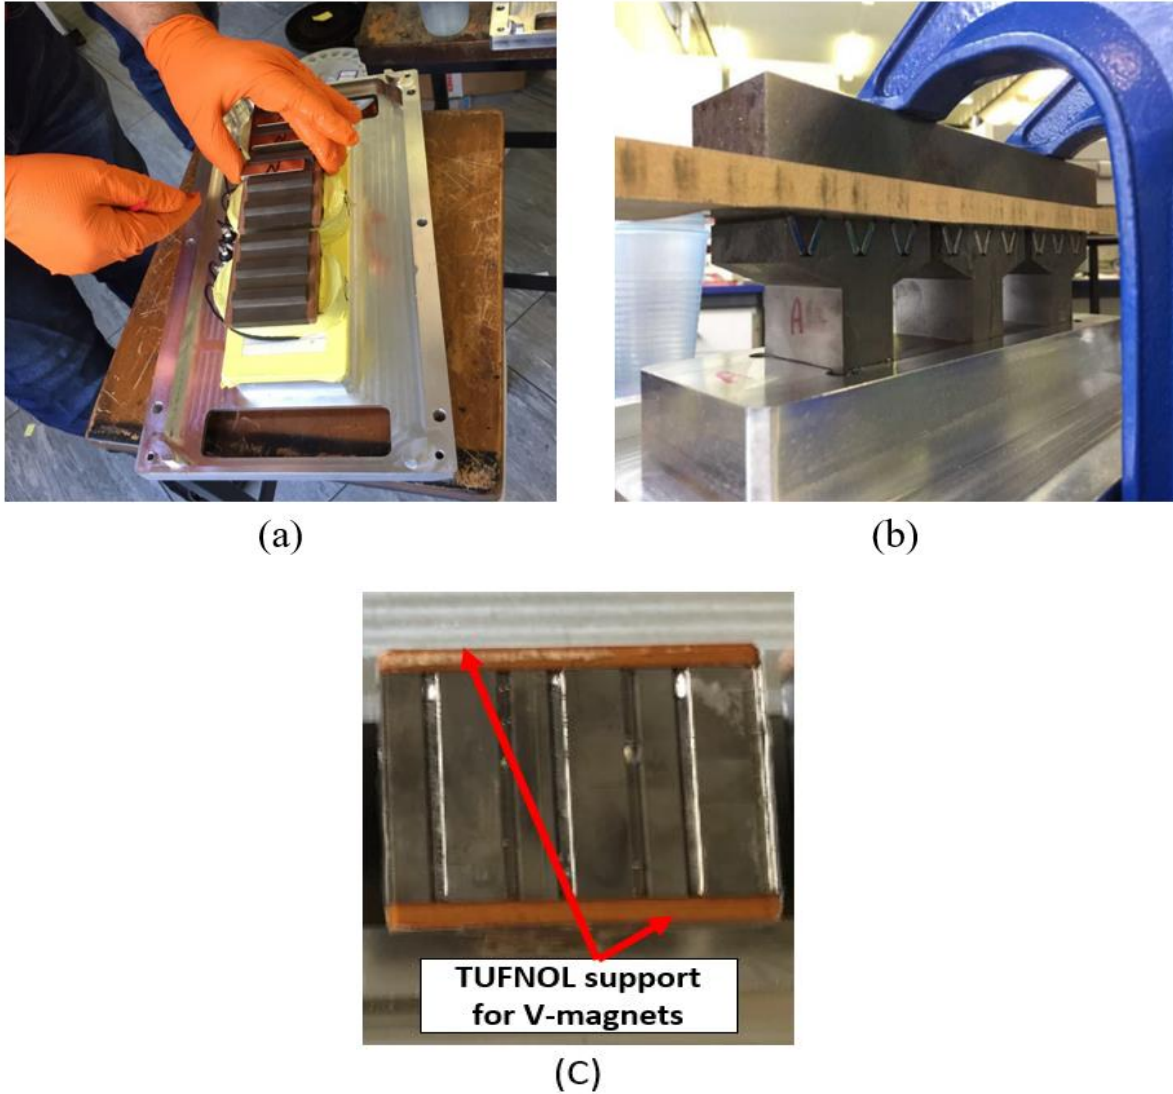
6: Magnet assembly (a) IMCP (b) VCP (c) Tufnol support for V-shape magnets
